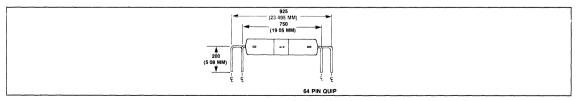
R6541Q & R6500/43 Dimensional Outline
